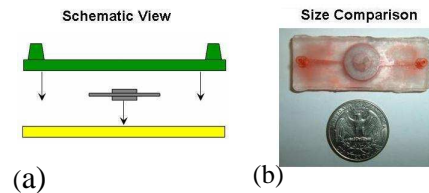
(a) A burst view of the assembly process. (b) An assembled micropump.
